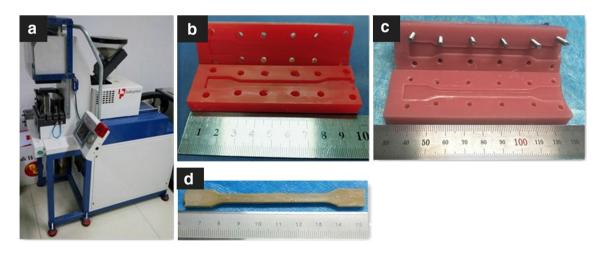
a Injection machine, b resin mould before injection, c resin mould after injection, d orthogonal test PEEK sample
